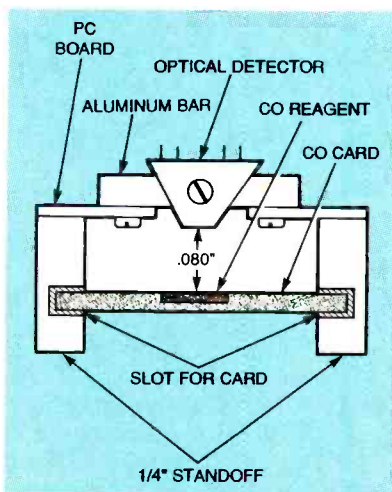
THE END OF THE OPTICAL SENSOR should be facing down through cutout in the PC board. Remove the aluminum bar and optical sensor from the board and put it aside. The sensor must be 0.08 inch above the reagent surface.
